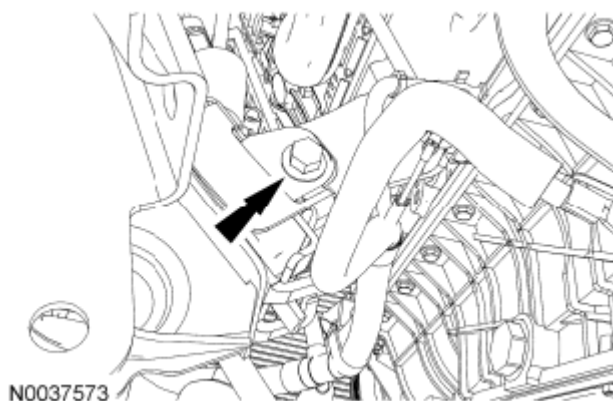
Locating LH Engine Support Insulator Through Bolt
